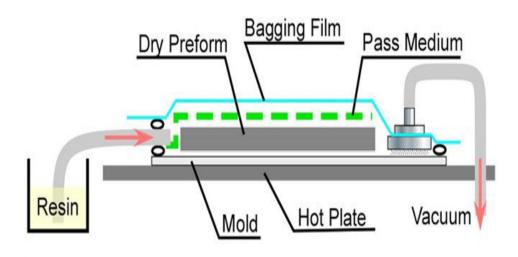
Vacuum-Assisted Resin Transfer-Molding Technique [4].
